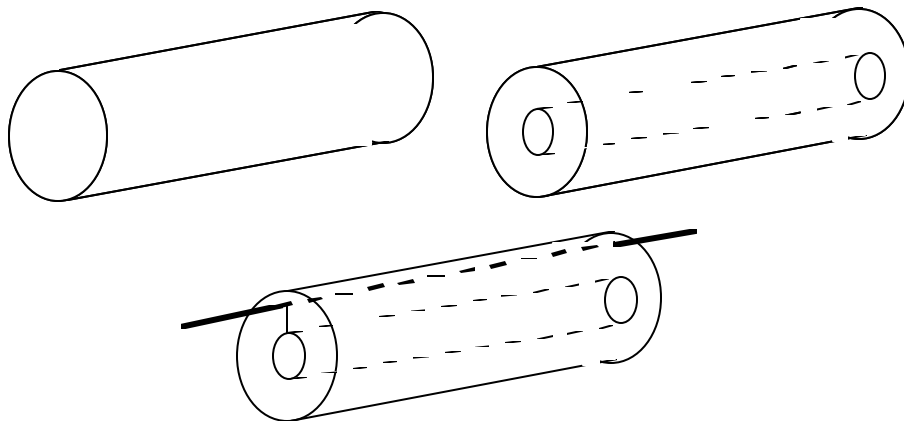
Electrodischarge Machining of SMA Torque Tube
